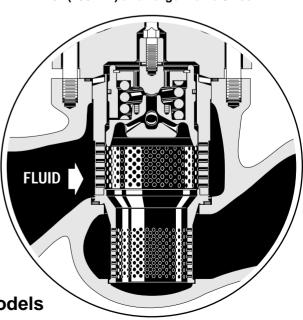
414•3 Model with LO-DB Cage and Diffuser; 6" (150 mm) and Larger Valve Sizes
